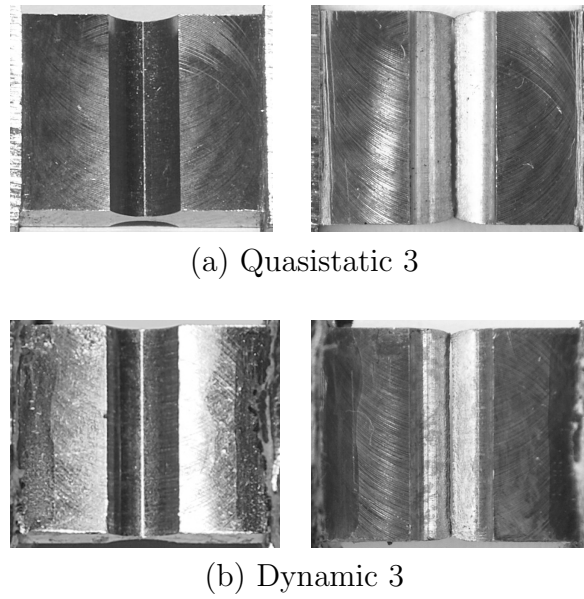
Photographs of the 2mm radius grooved specimens.
